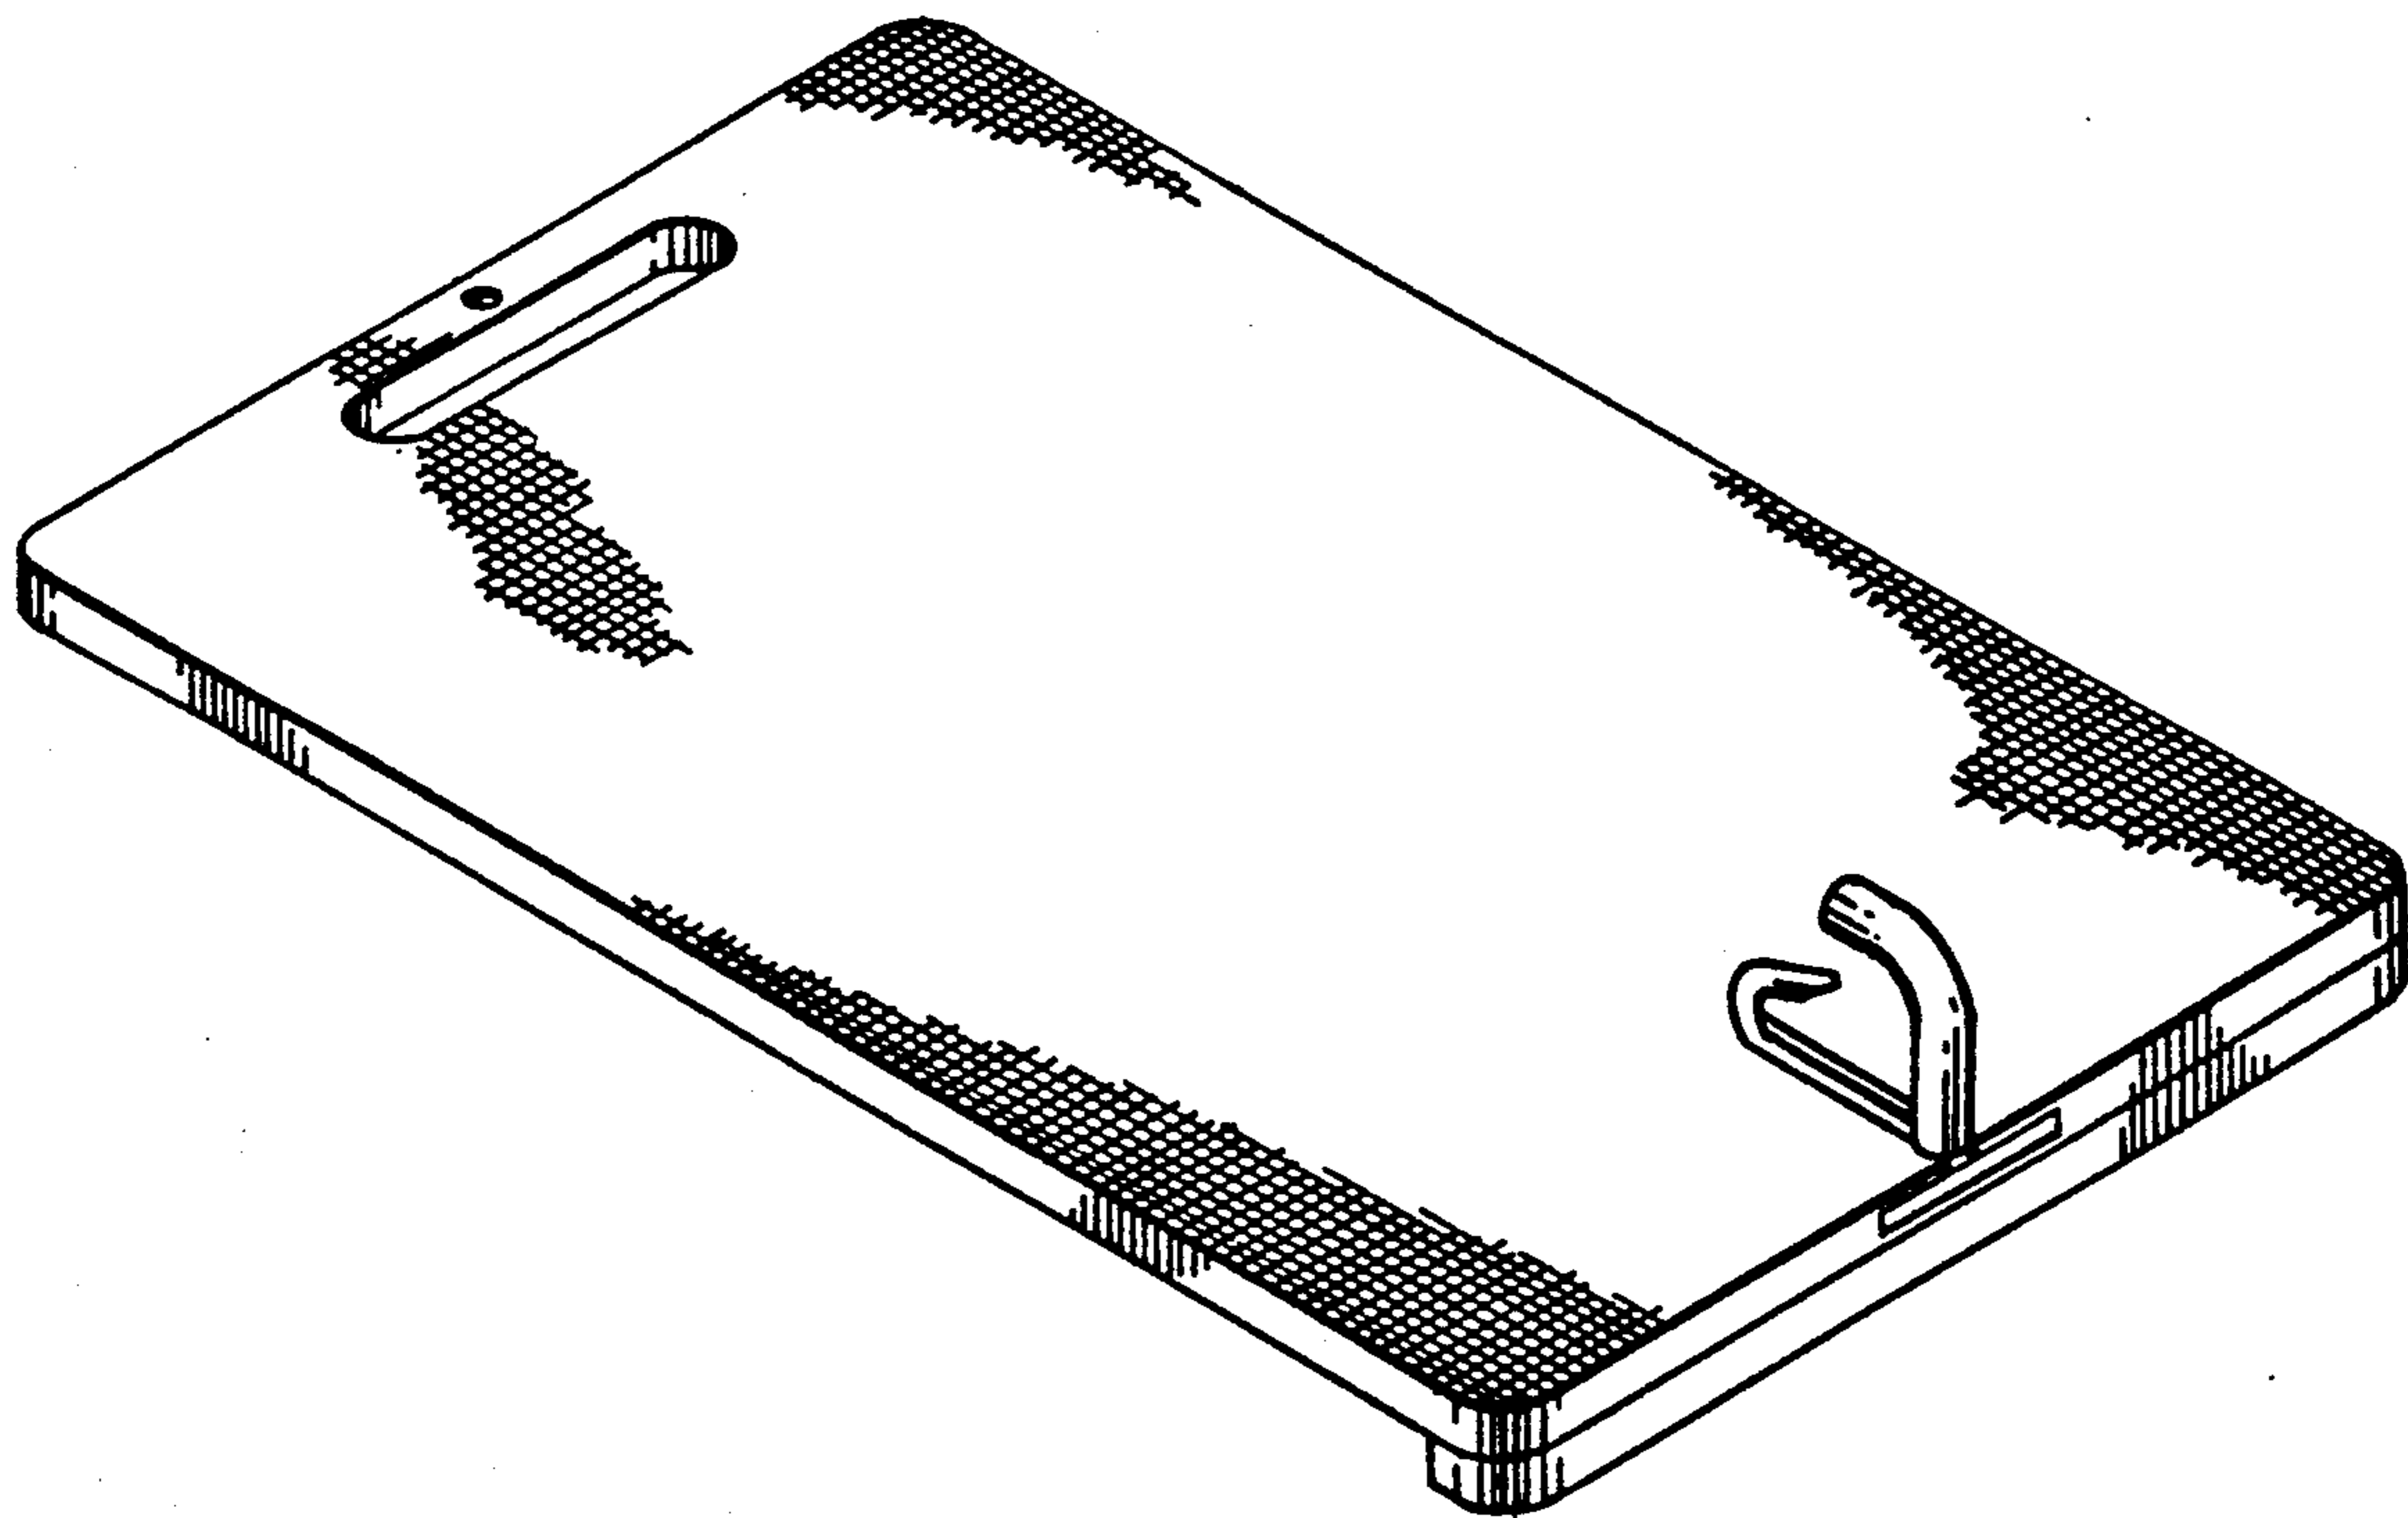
is a left, front and top perspective view of a cutting board for fish showing my new design;
